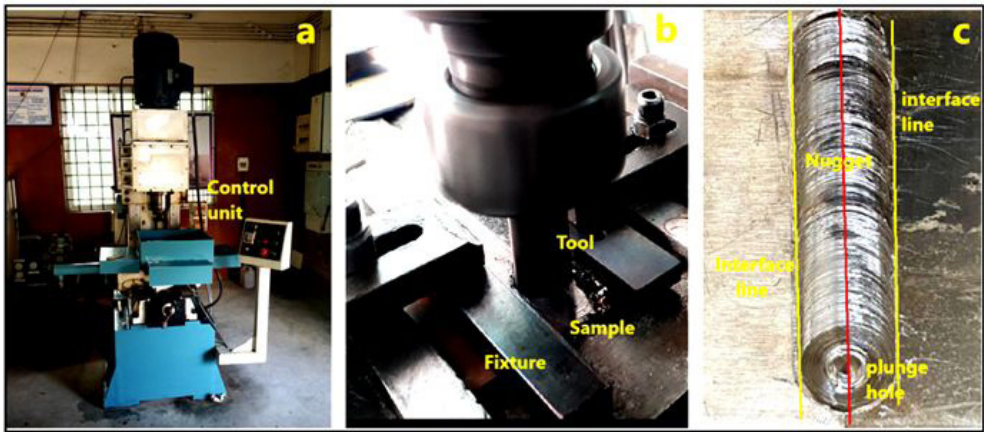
(a) Welding setup, (b) butt weld configuration and (c) welded joint of metal matrix composites.
